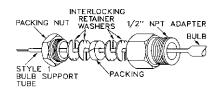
Part No. FTG13A-600R packing nut assembly.
